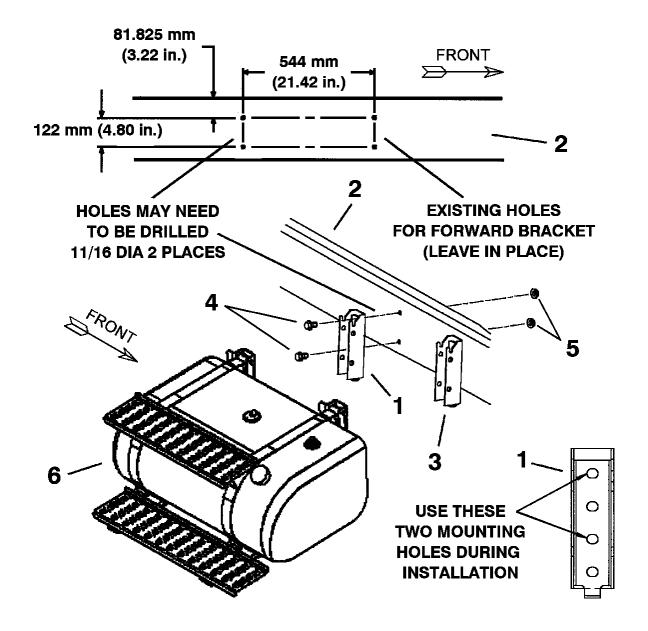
Drilling Rear Fuel Tank Mounting Bracket Mounting Holes and Installing Rear Fuel Tank Mounting Bracket
